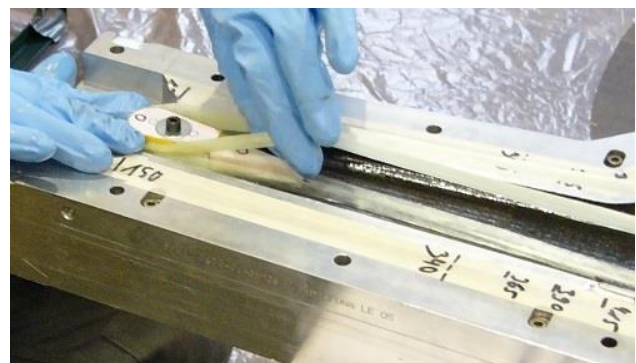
Glass fiber tape during deposition (other rotor blade with glass spar instead of carbon spar shown)
